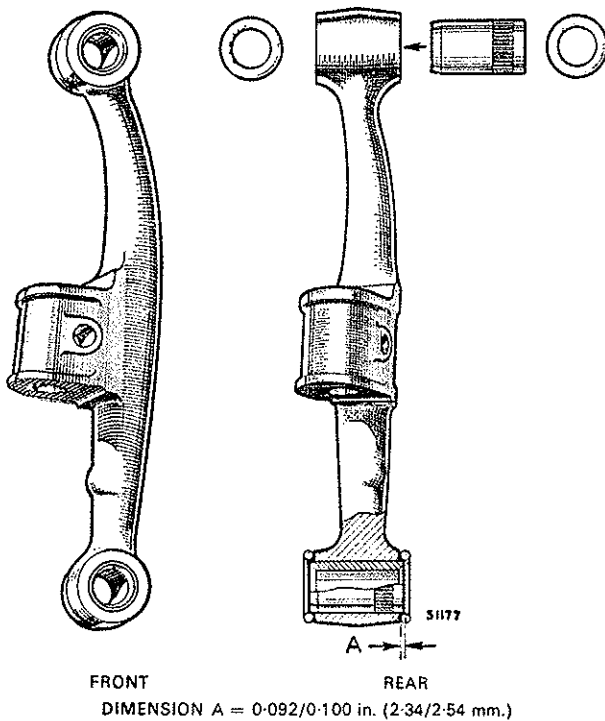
Fitting of threaded bushes to the stub axle carrier. The new bush is pressed in from the rear
